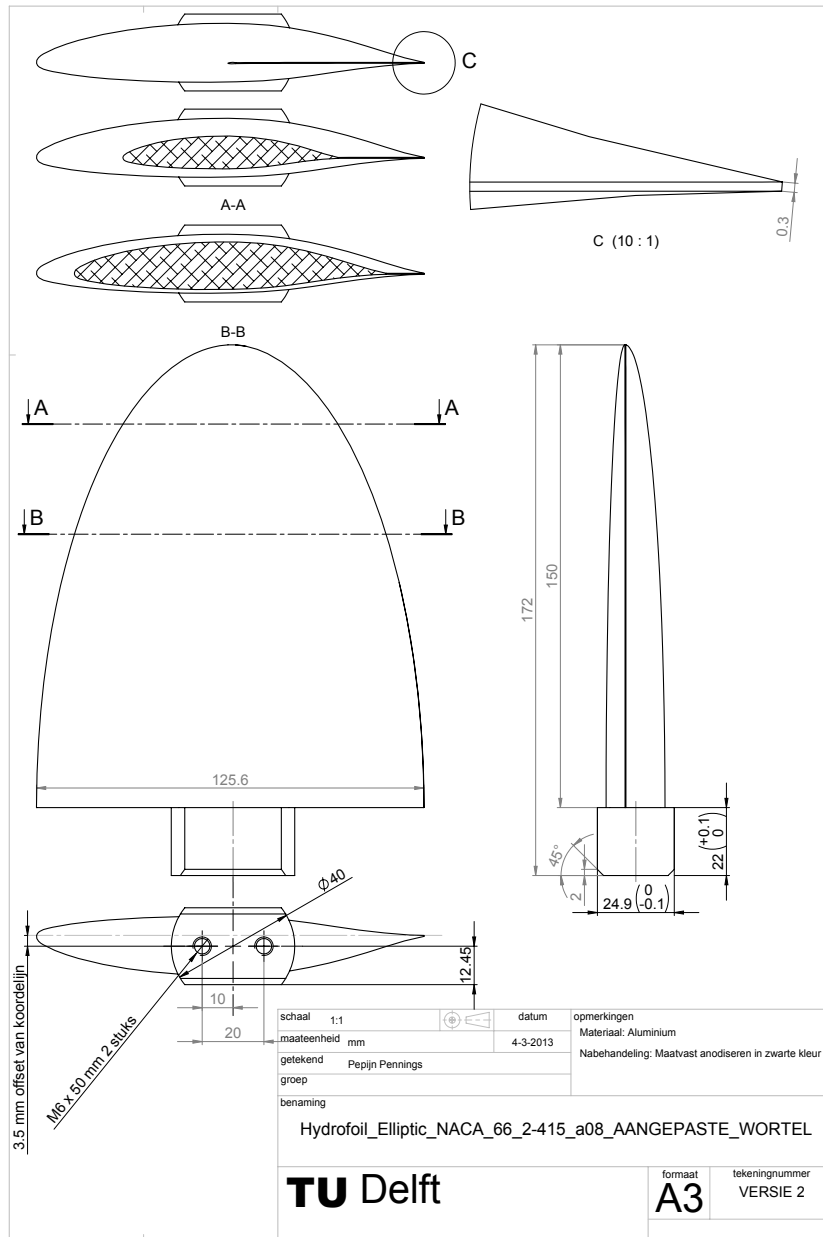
Technical drawing of the 'Arndt' wing (Pennings et al., 2015b). Note measurement unit is mm.
